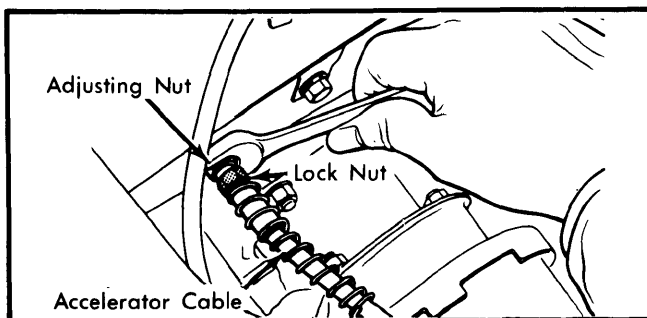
Adjusting Accelerator Cable Free Play (Champ & Colt)
